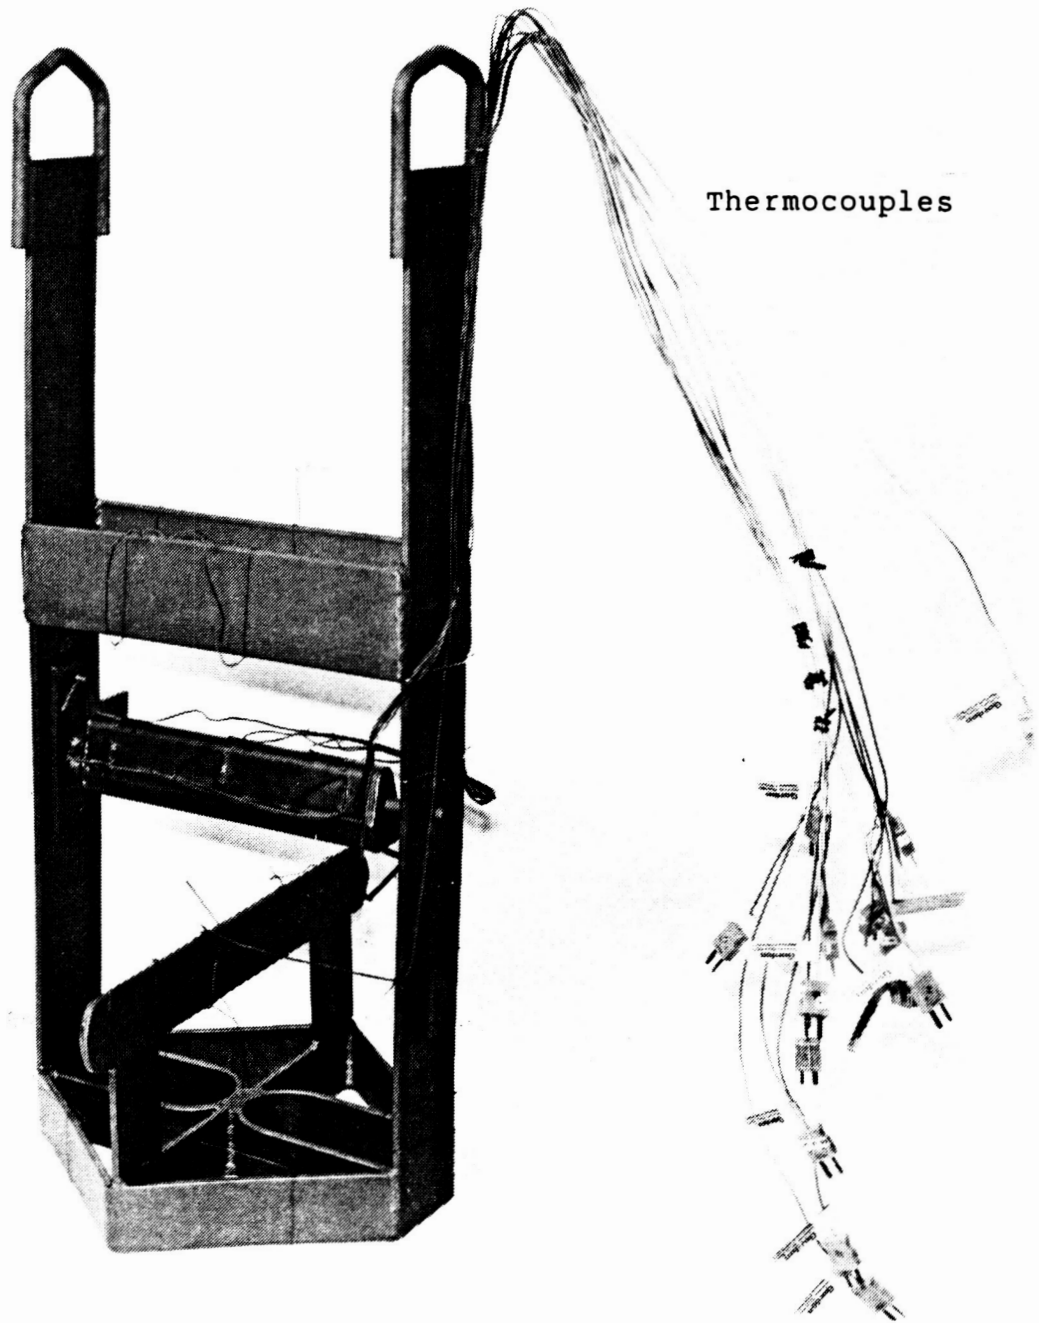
PHOTOGRAPH OF CANISTER HELD IN FURNACE FIXTURE
